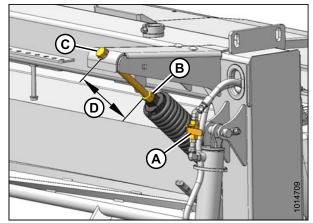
Lift Cylinder Lock-Out Valve, Jam Nut, and Adjuster Bolt
